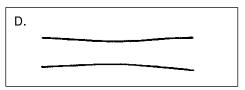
Fig. D. Uneven wear caused by belt being too loose or engine idle speed being too high.
